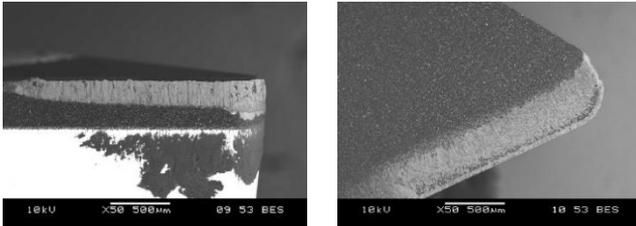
PCD tools after turning AK7-SiC material: a) surface of application, b) rake surface (cutting speed: 500 m/min, feedrate: 0.20 mm/rev, depth of cut: 2.0 mm)
